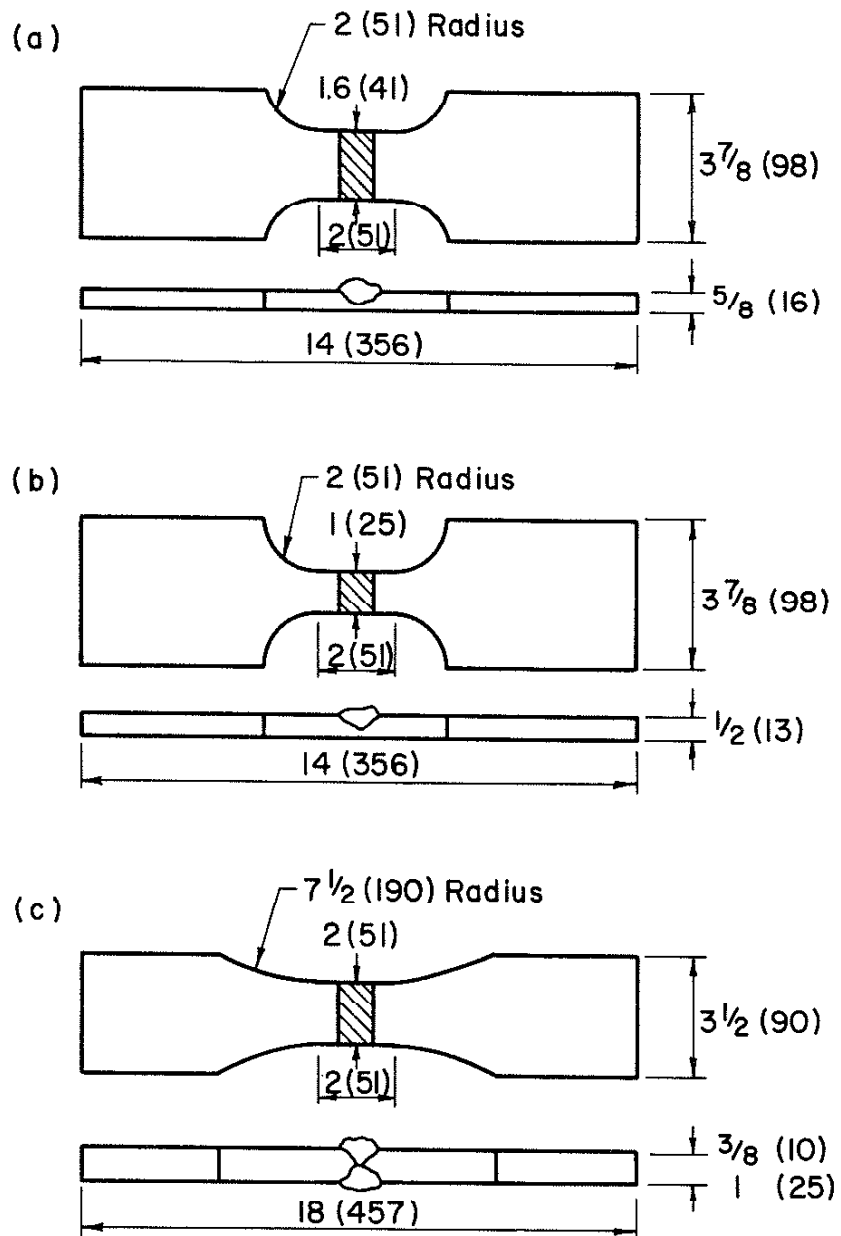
SHAPE OF (a) A36/E60S-3 STEEL, (b) A514F/E110 STEEL, AND (c) 5083-O/5183 ALUMINUM BUTT WELD TEST SPECIMENS. (ALL DIMENSIONS ARE IN INCHES (mm)).
